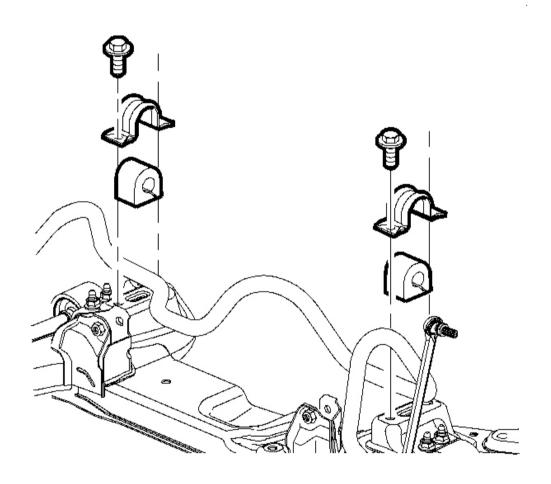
Stabilizer Bar Clamp & Cradle Bolts Courtesy of GENERAL MOTORS CORP.
